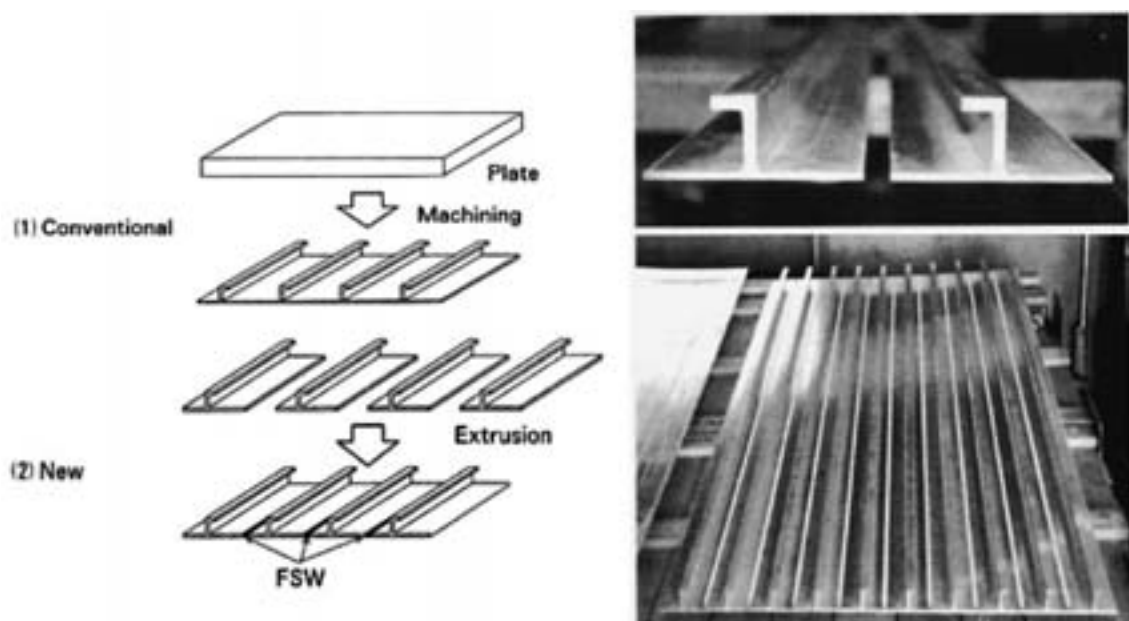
Large integral wing panel made by friction stir welding^{117,131)}
